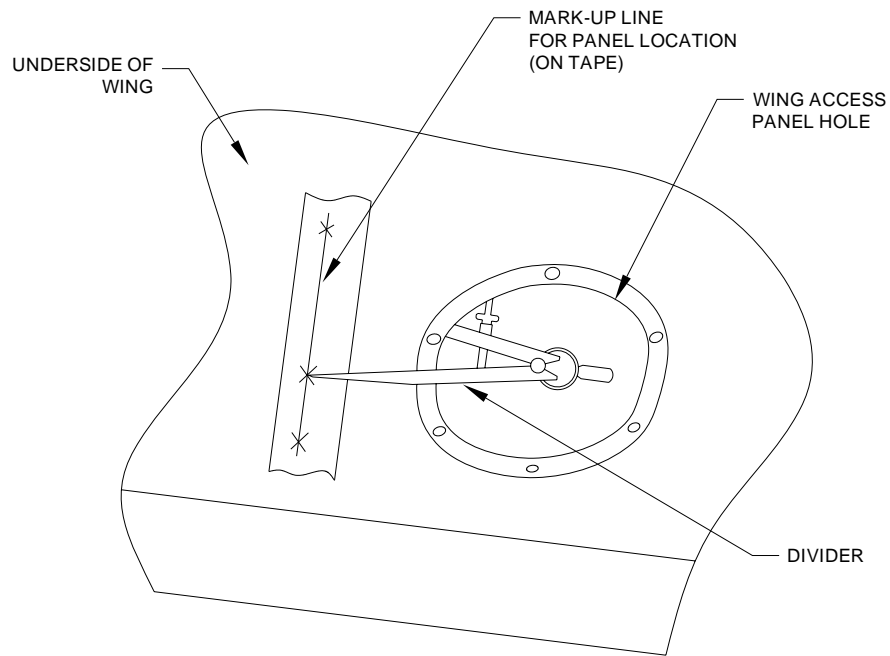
Transferring the Mounting Plate Alignment to the Underside of the Wing
